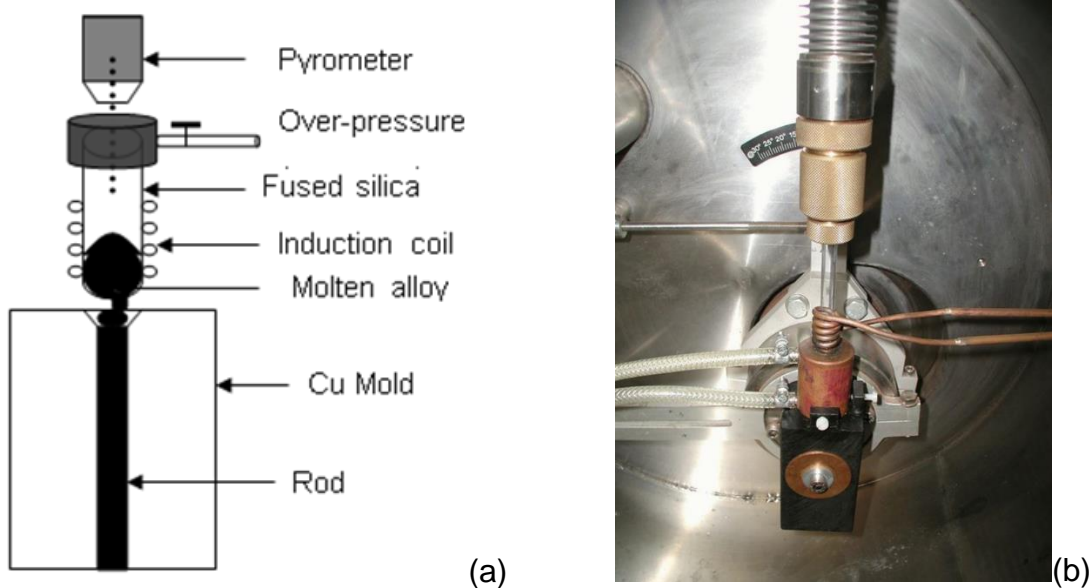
(a) A sketch of the used injection copper mold casting apparatus and (b) the picture of the actual device used at IFW Dresden.
